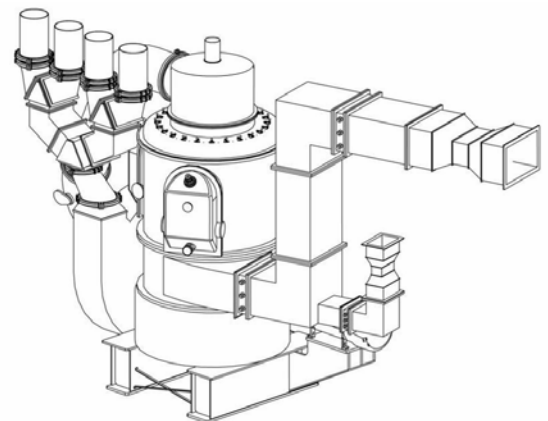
RS Mill equipped with STI Hot & Cold Air measuring venturi(s)
